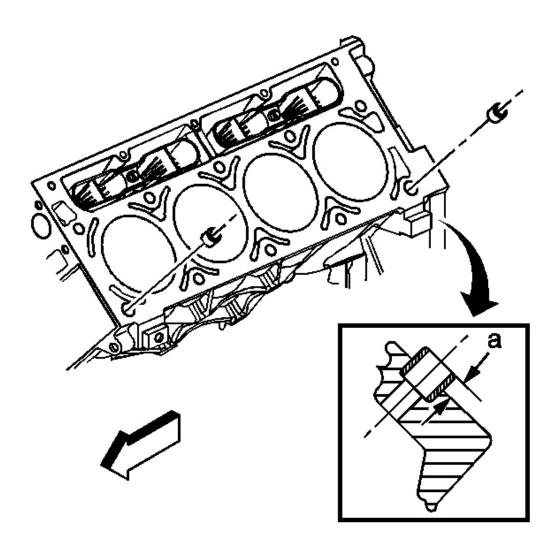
Checking Cylinder Head Bolt Holes Courtesy of GENERAL MOTORS CORP.
